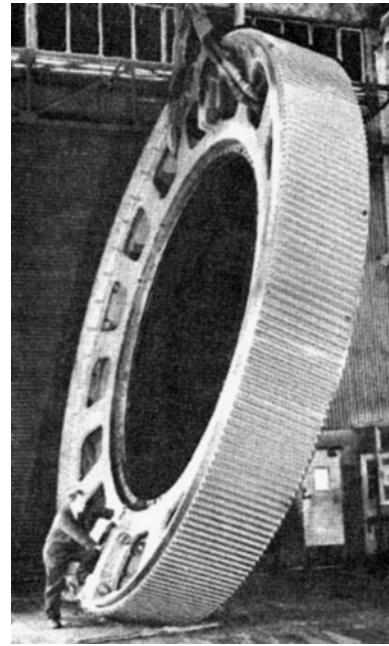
Jumbo-size drive gear for a large mill application. (Courtesy of David Brown Gear Industries, Huddersfield, U.K.)
